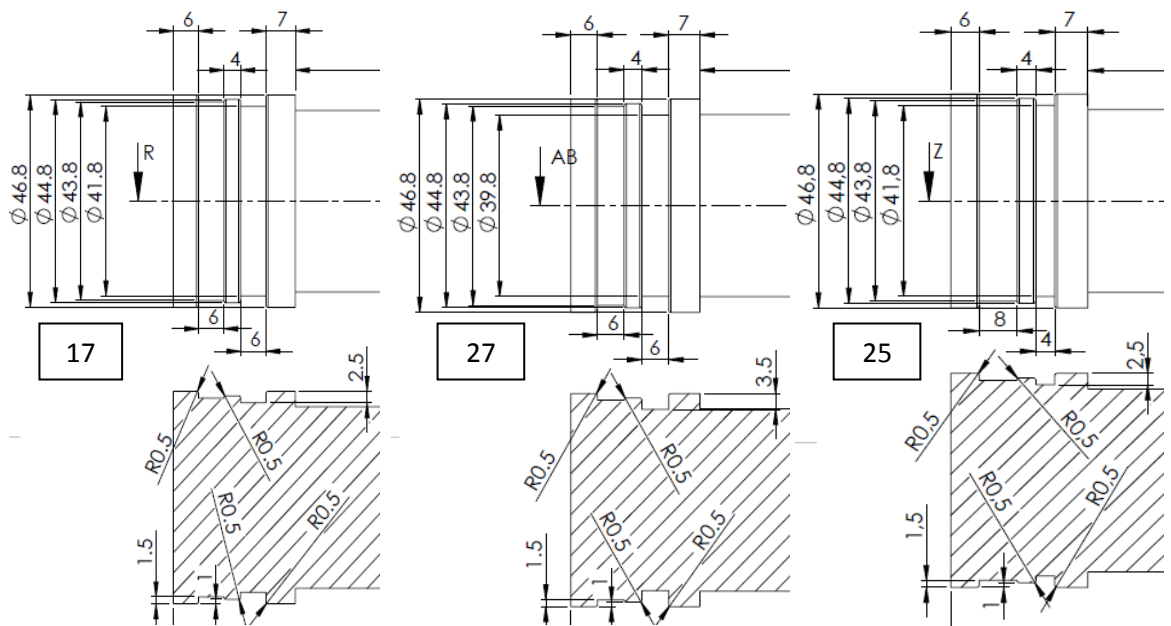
Technical drawings of designs 17, 25 and 27.
